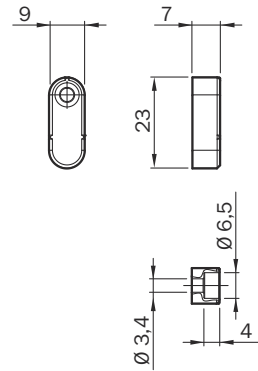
Dimensional drawing of "Mini" STR1 actuator
